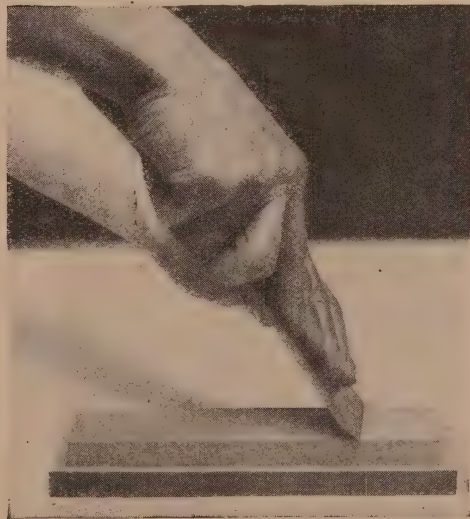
Sharpening Plane Iron: Angle too Steep
